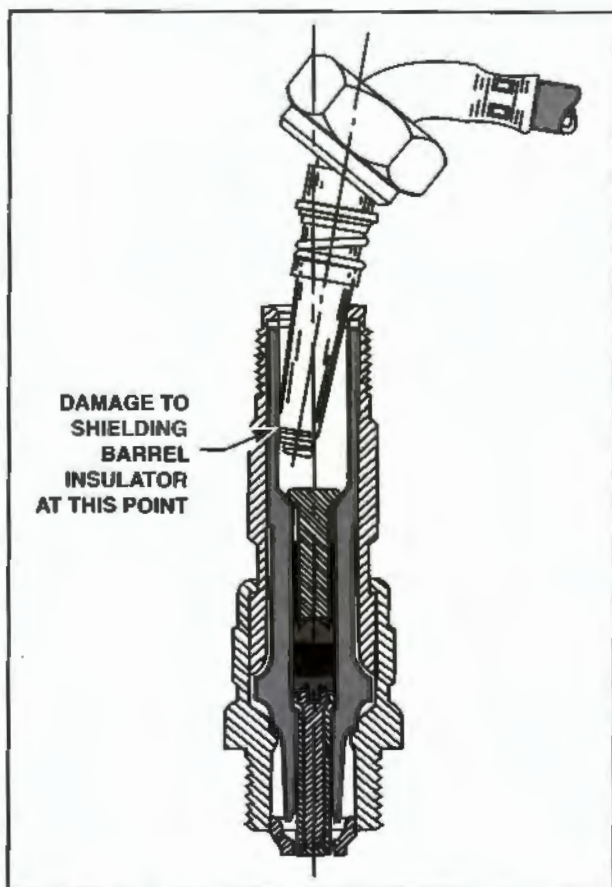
When removing the ignition lead from a spark plug, pull the terminal straight out of the plug. A side load on the ceramic insulator could cause a crack in the insulator.
